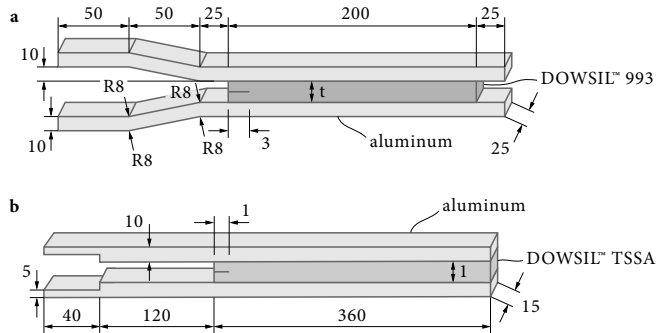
Geometry of cleavage double cantilever beam specimens for a DOWSIL™ 993 and b DOWSIL™ TSSA. Dimensions in mm.
